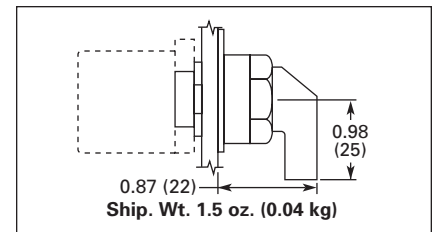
E22 Series 2-Position — 45° Throw — Lever
